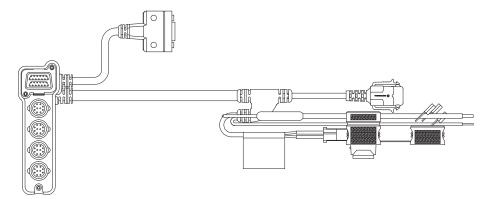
Motorcycle Control Head Cabling (3075217A01)
